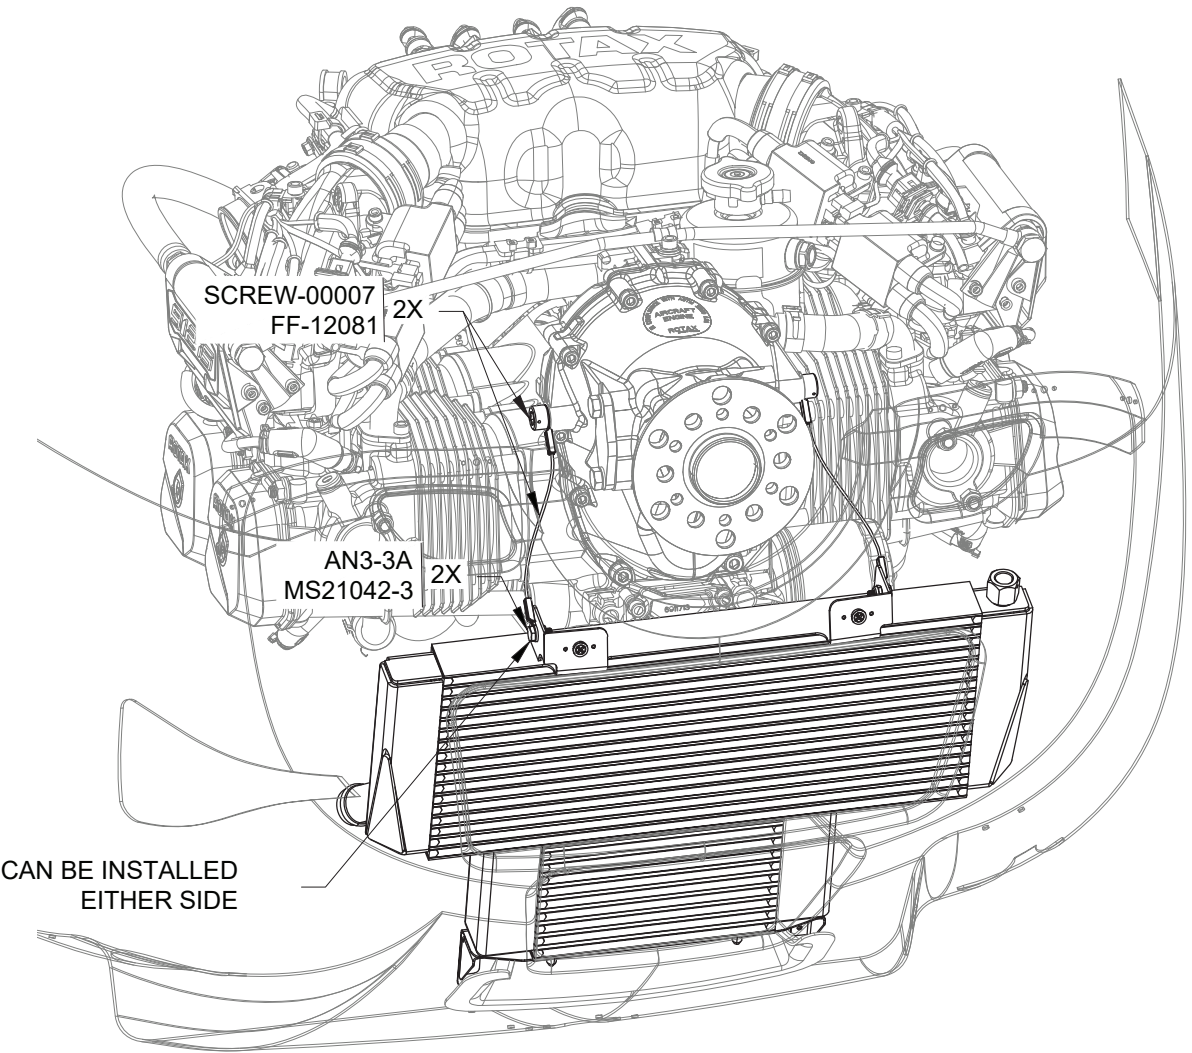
ATTACH RADIATOR & OIL COOLER TO ENGINE
